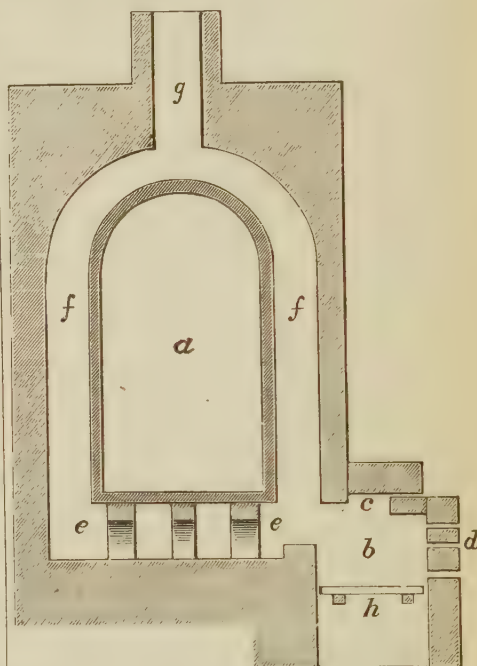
TRANSVERSE SECTION OF ENAMELLING KILN.
